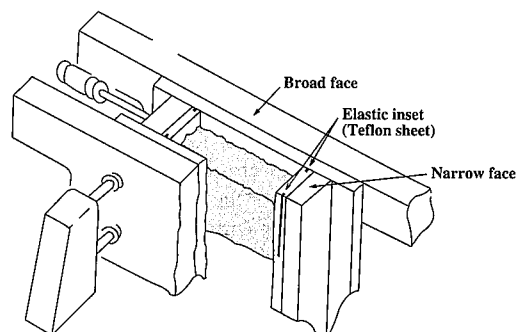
Mold with Teflon sheets inserted in narrow faces
